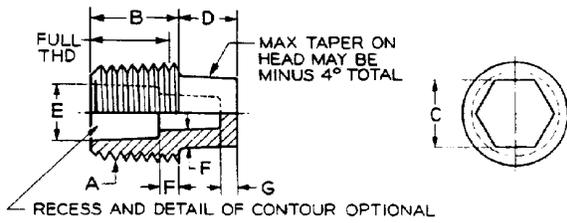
C—HEXAGON INSIDE HEAD PIPE PLUGS (130109C)
